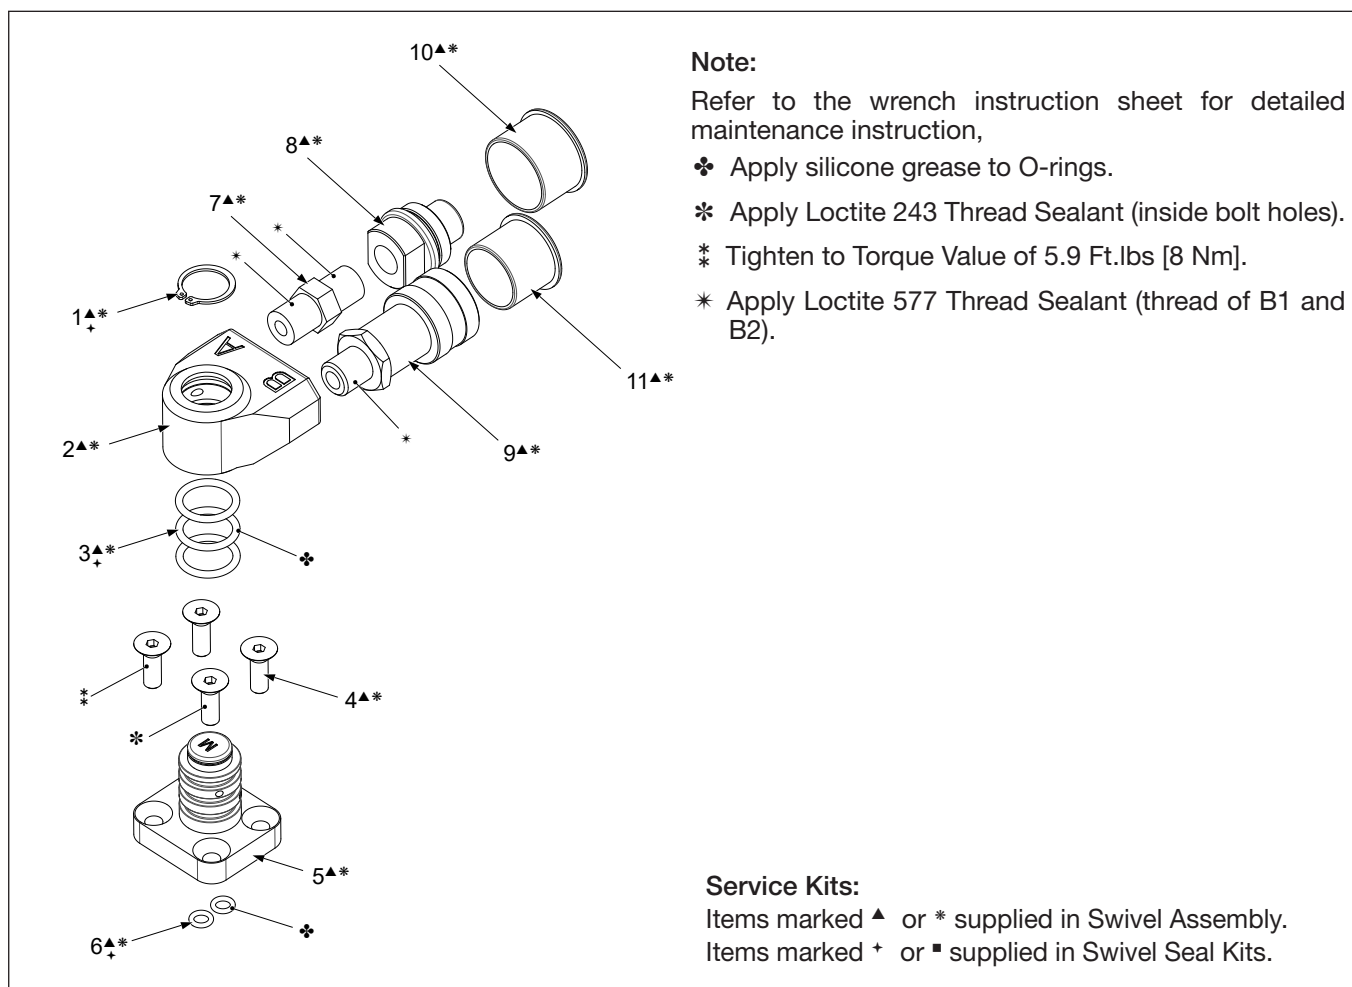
Exploded View, DSX Torque Wrench Standard Swivel Assembly
